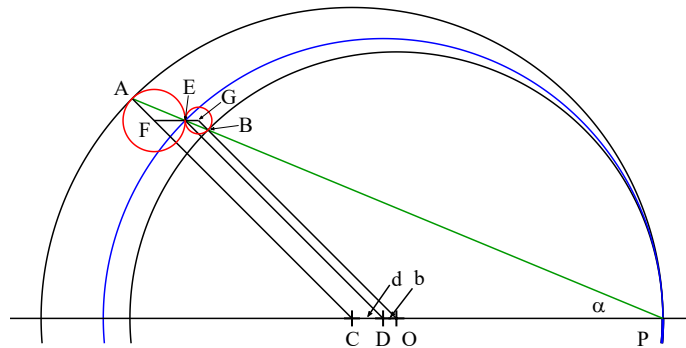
Contact diagram for cycloidal gerotor gearing
